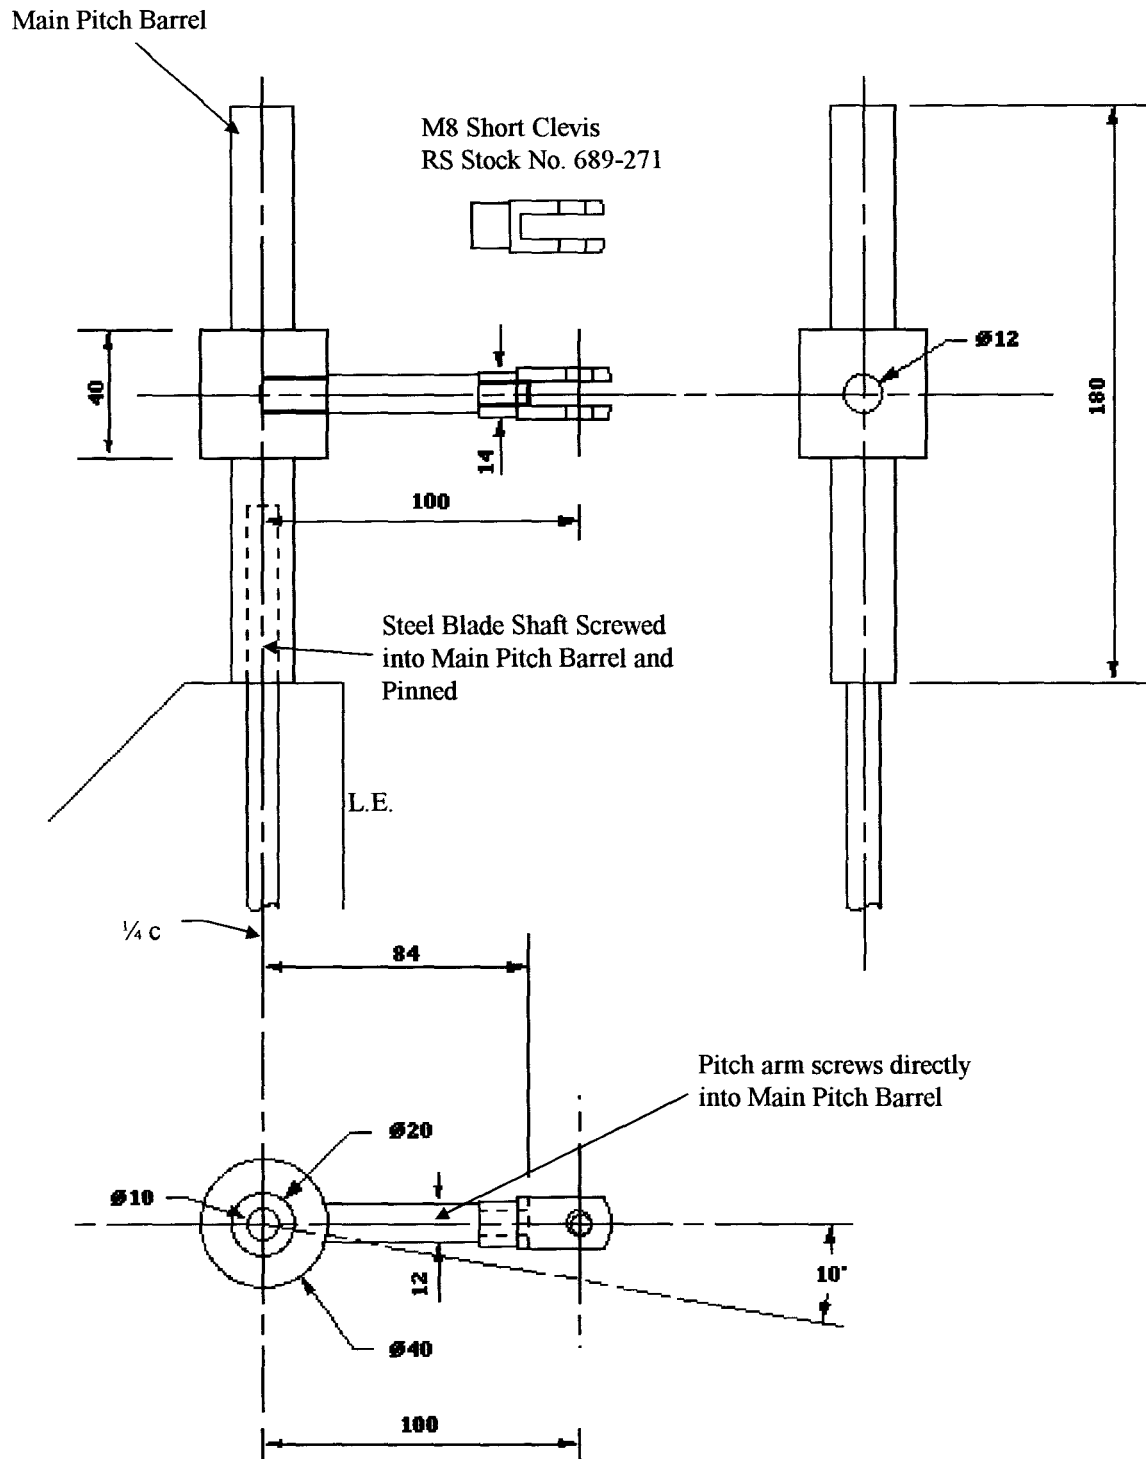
Technical Drawing of pitch barrel and pitch arm.
